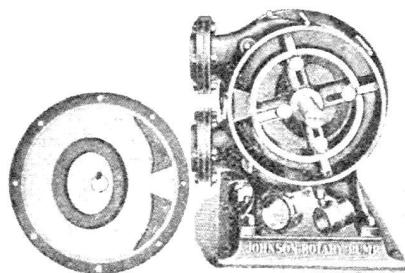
Interior view of Johnson Rotary Pump shown in Fig. 27.
